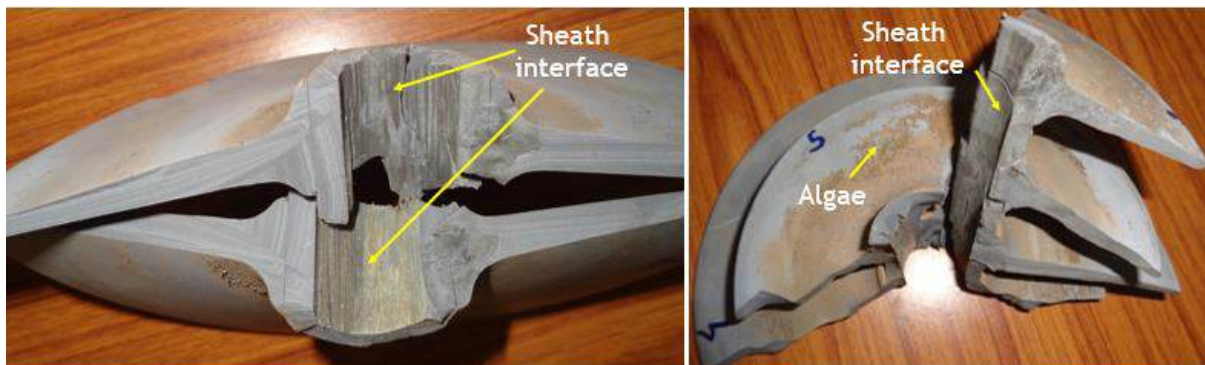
Failed insulator (SRI-1) silicone rubber housing removed from the insulator. The interface with composite rod is smooth
